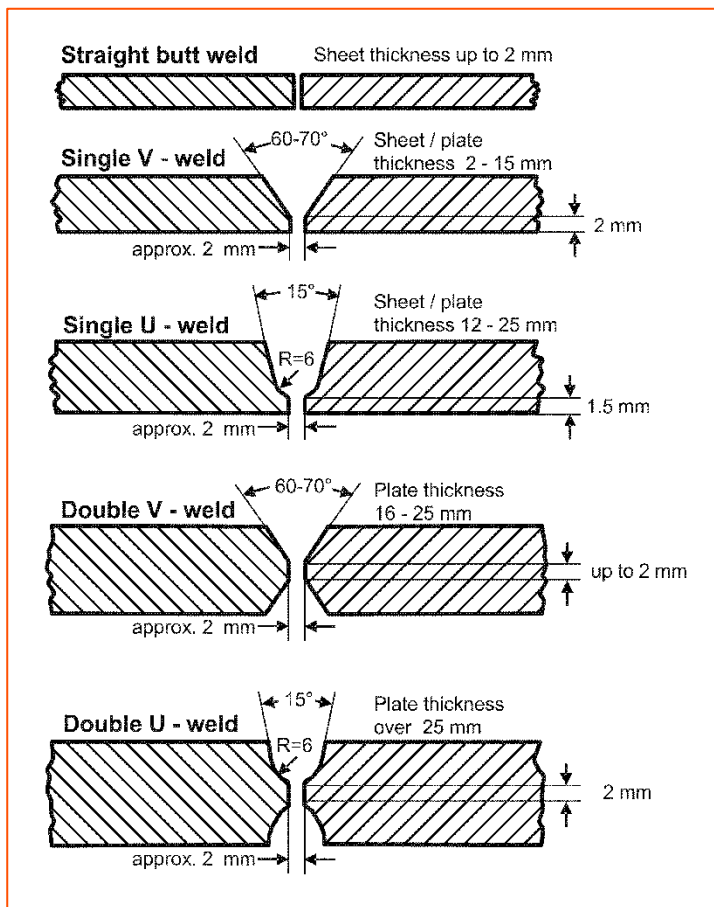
Edge preparations for welding nickel alloys and special stainless steels
